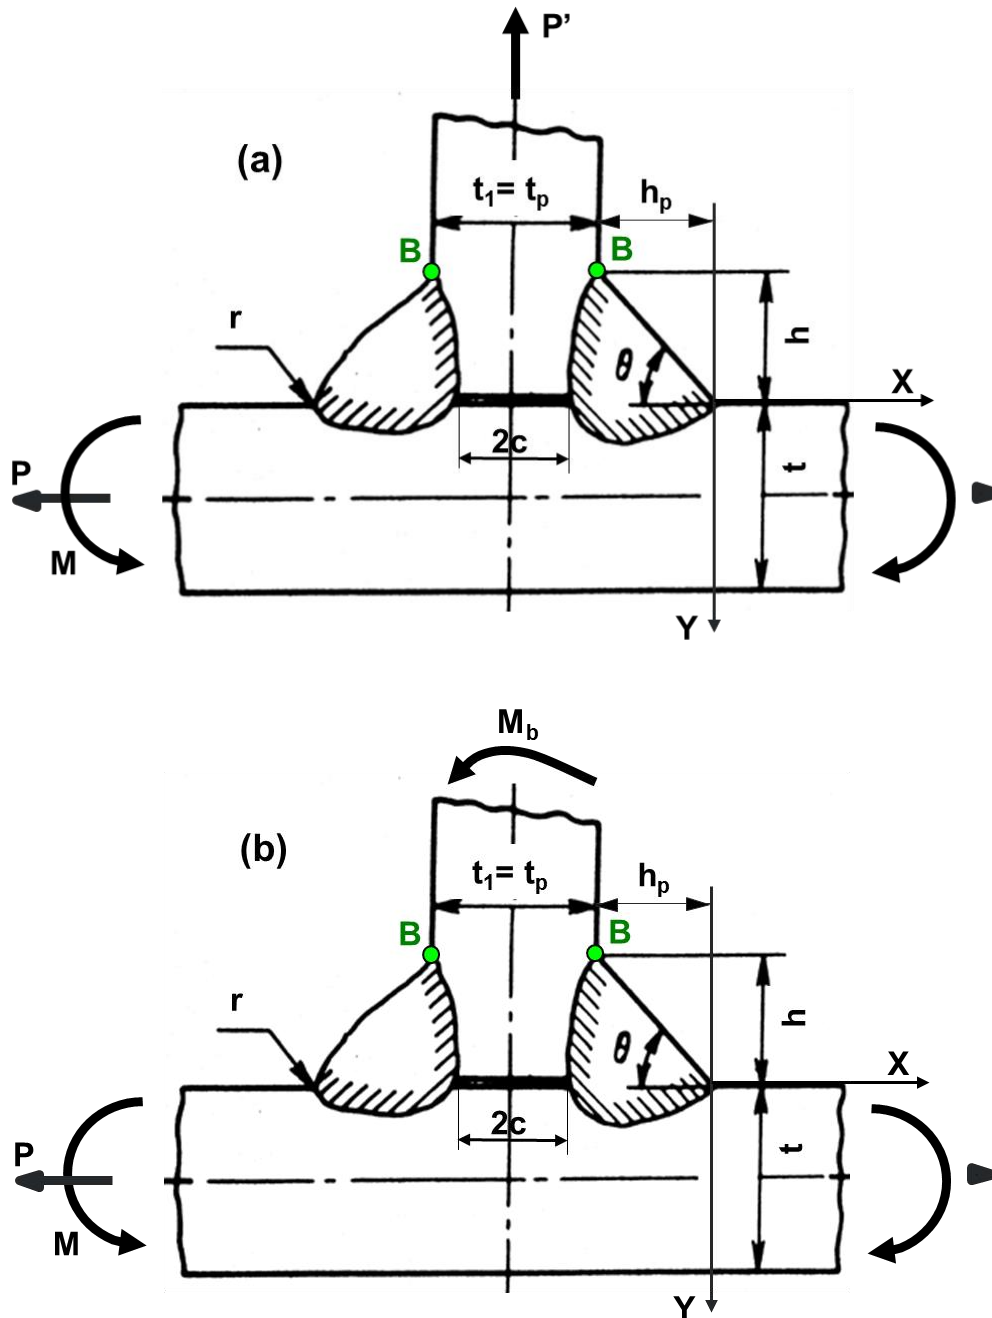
Symmetric fillet weld under (a) axial load (b) bending load
